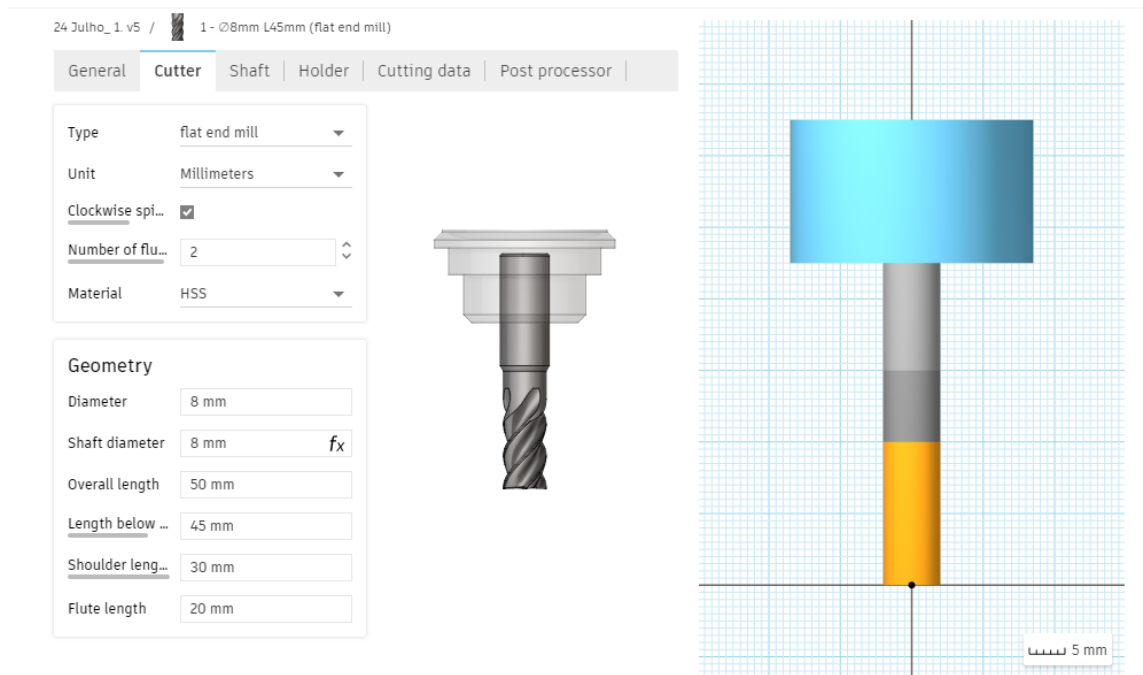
Flat end mill tool used to machine part1, in this image is represented the tool's parameters within Fusion 360
